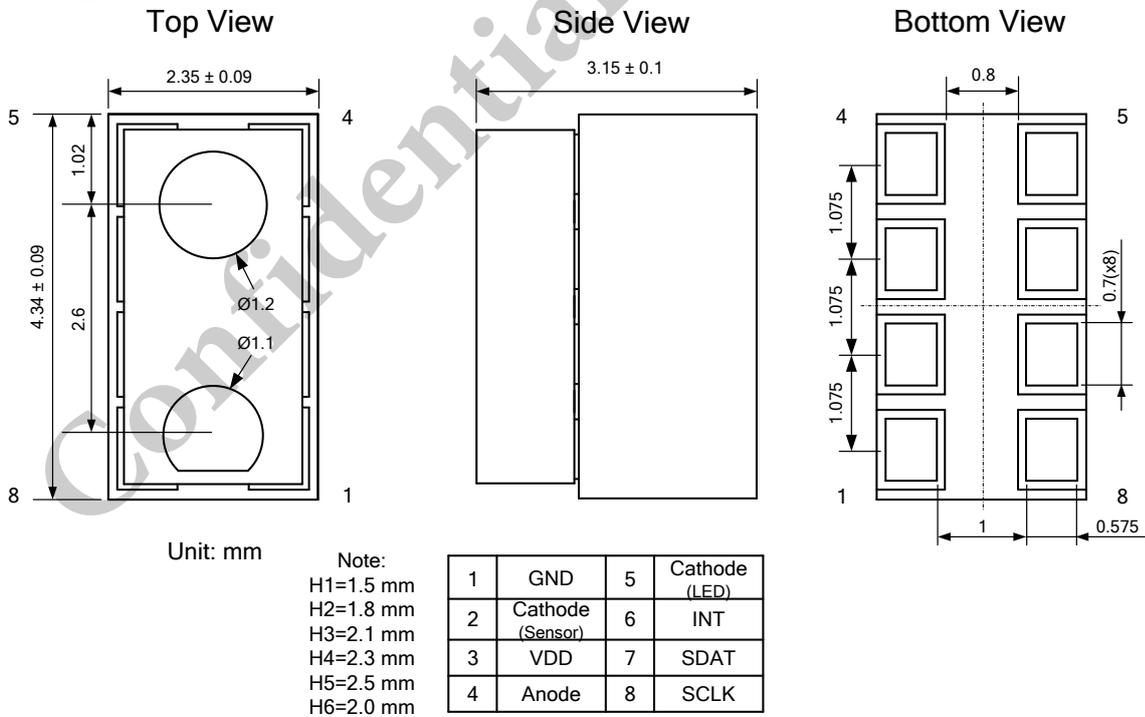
CM36652M3OE-H6 Package Dimensions
